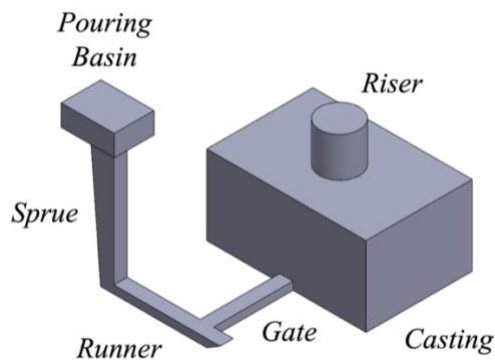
Basic metal casting diagram, showing the pouring basin, sprue, runner, gate, and riser components, along with the casting itself.
